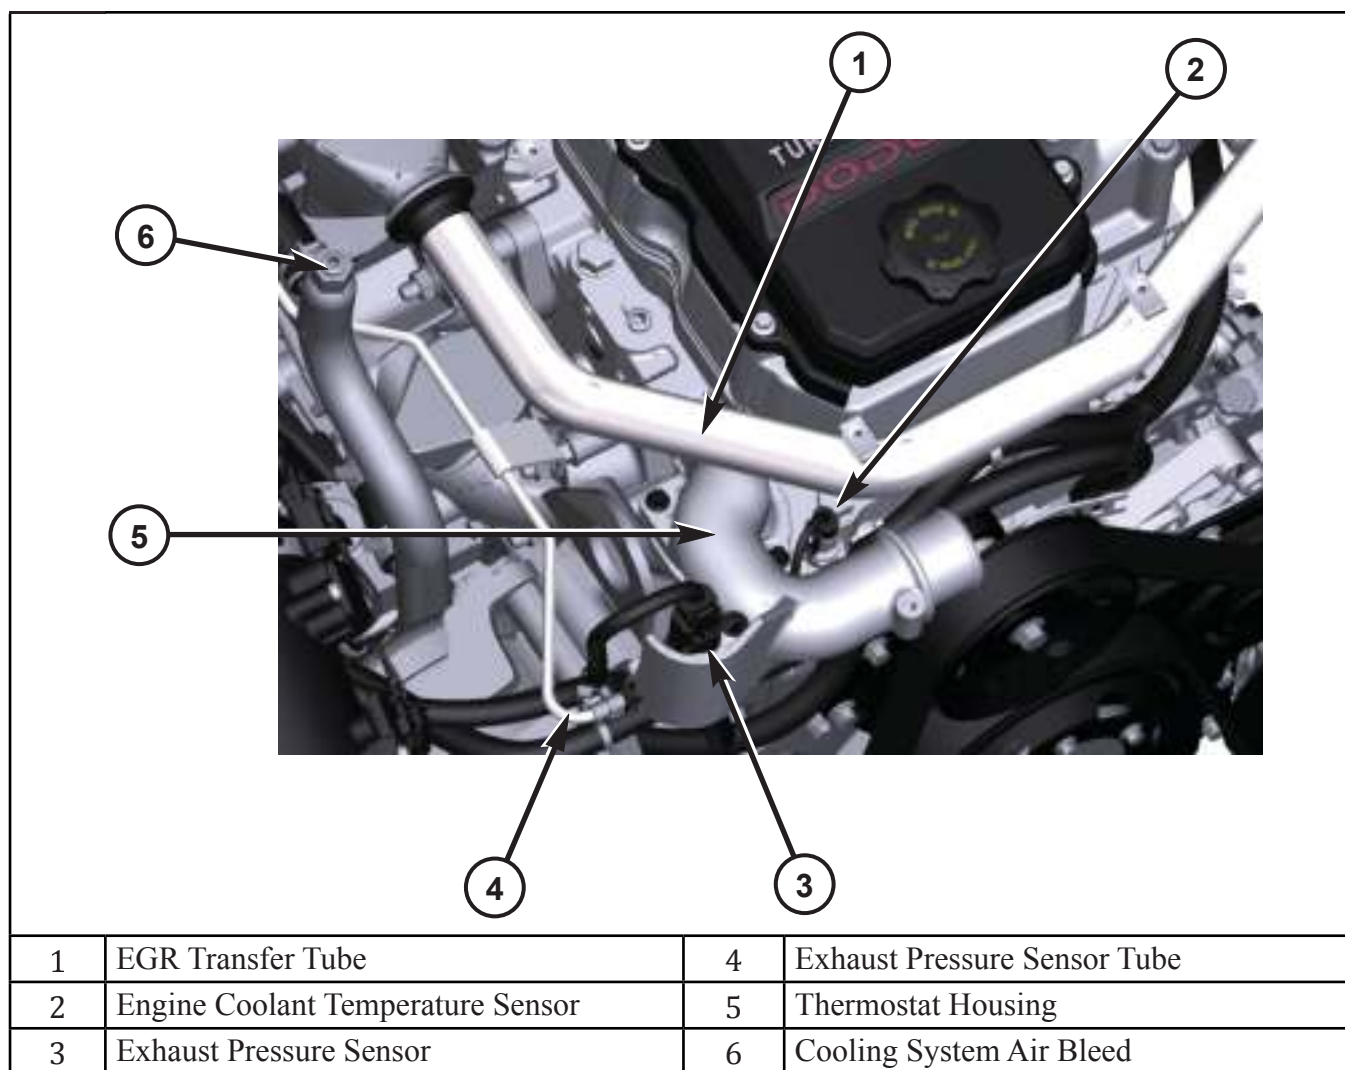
Exhaust Manifold Pressure Sensor (Chassis Cab Shown)
